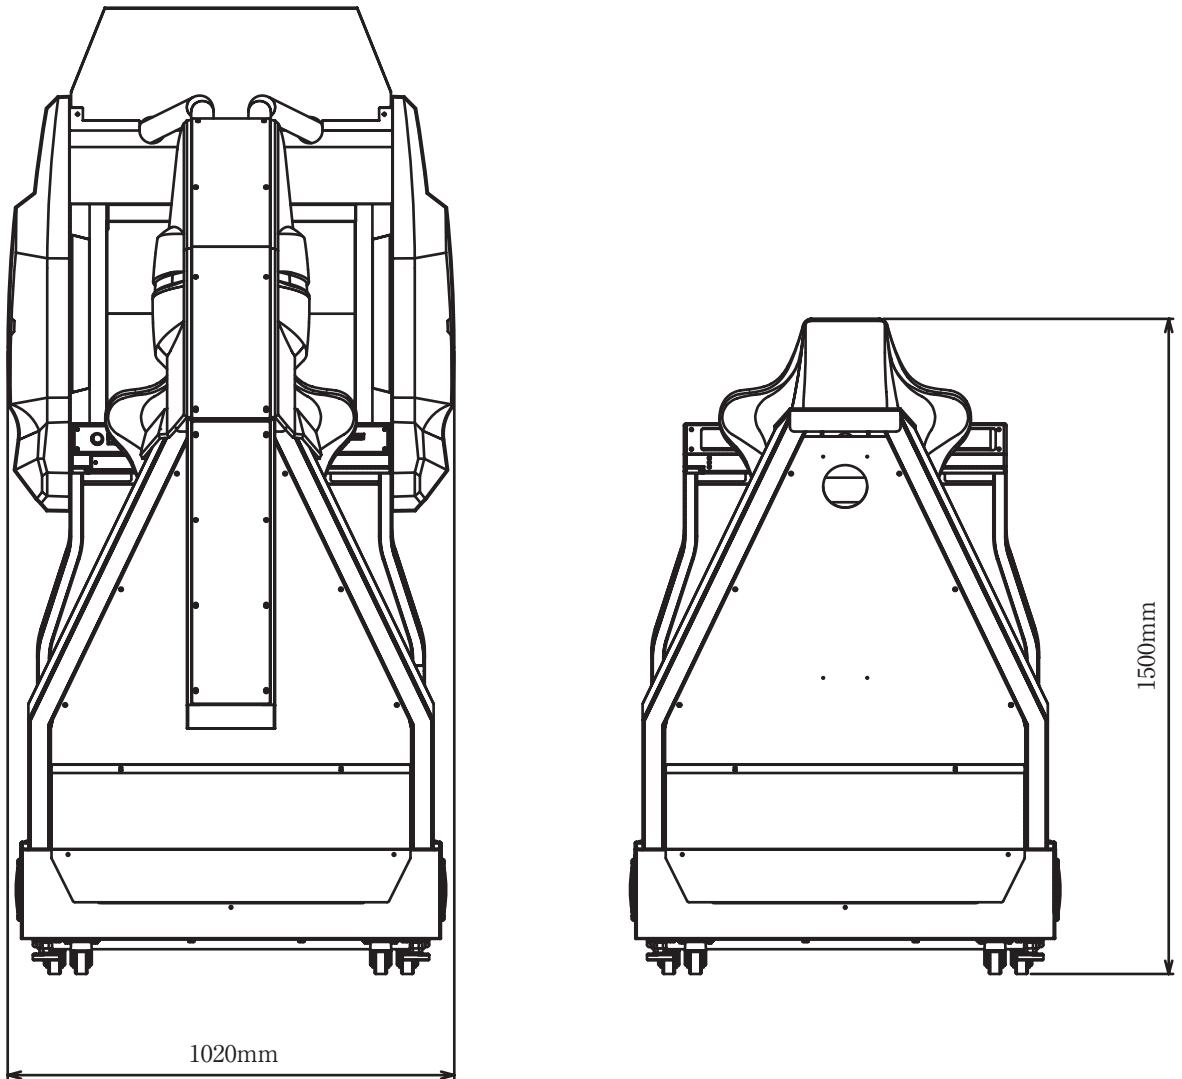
b DIMENSIONS OF THE MACHINE DISASSEMBLED
